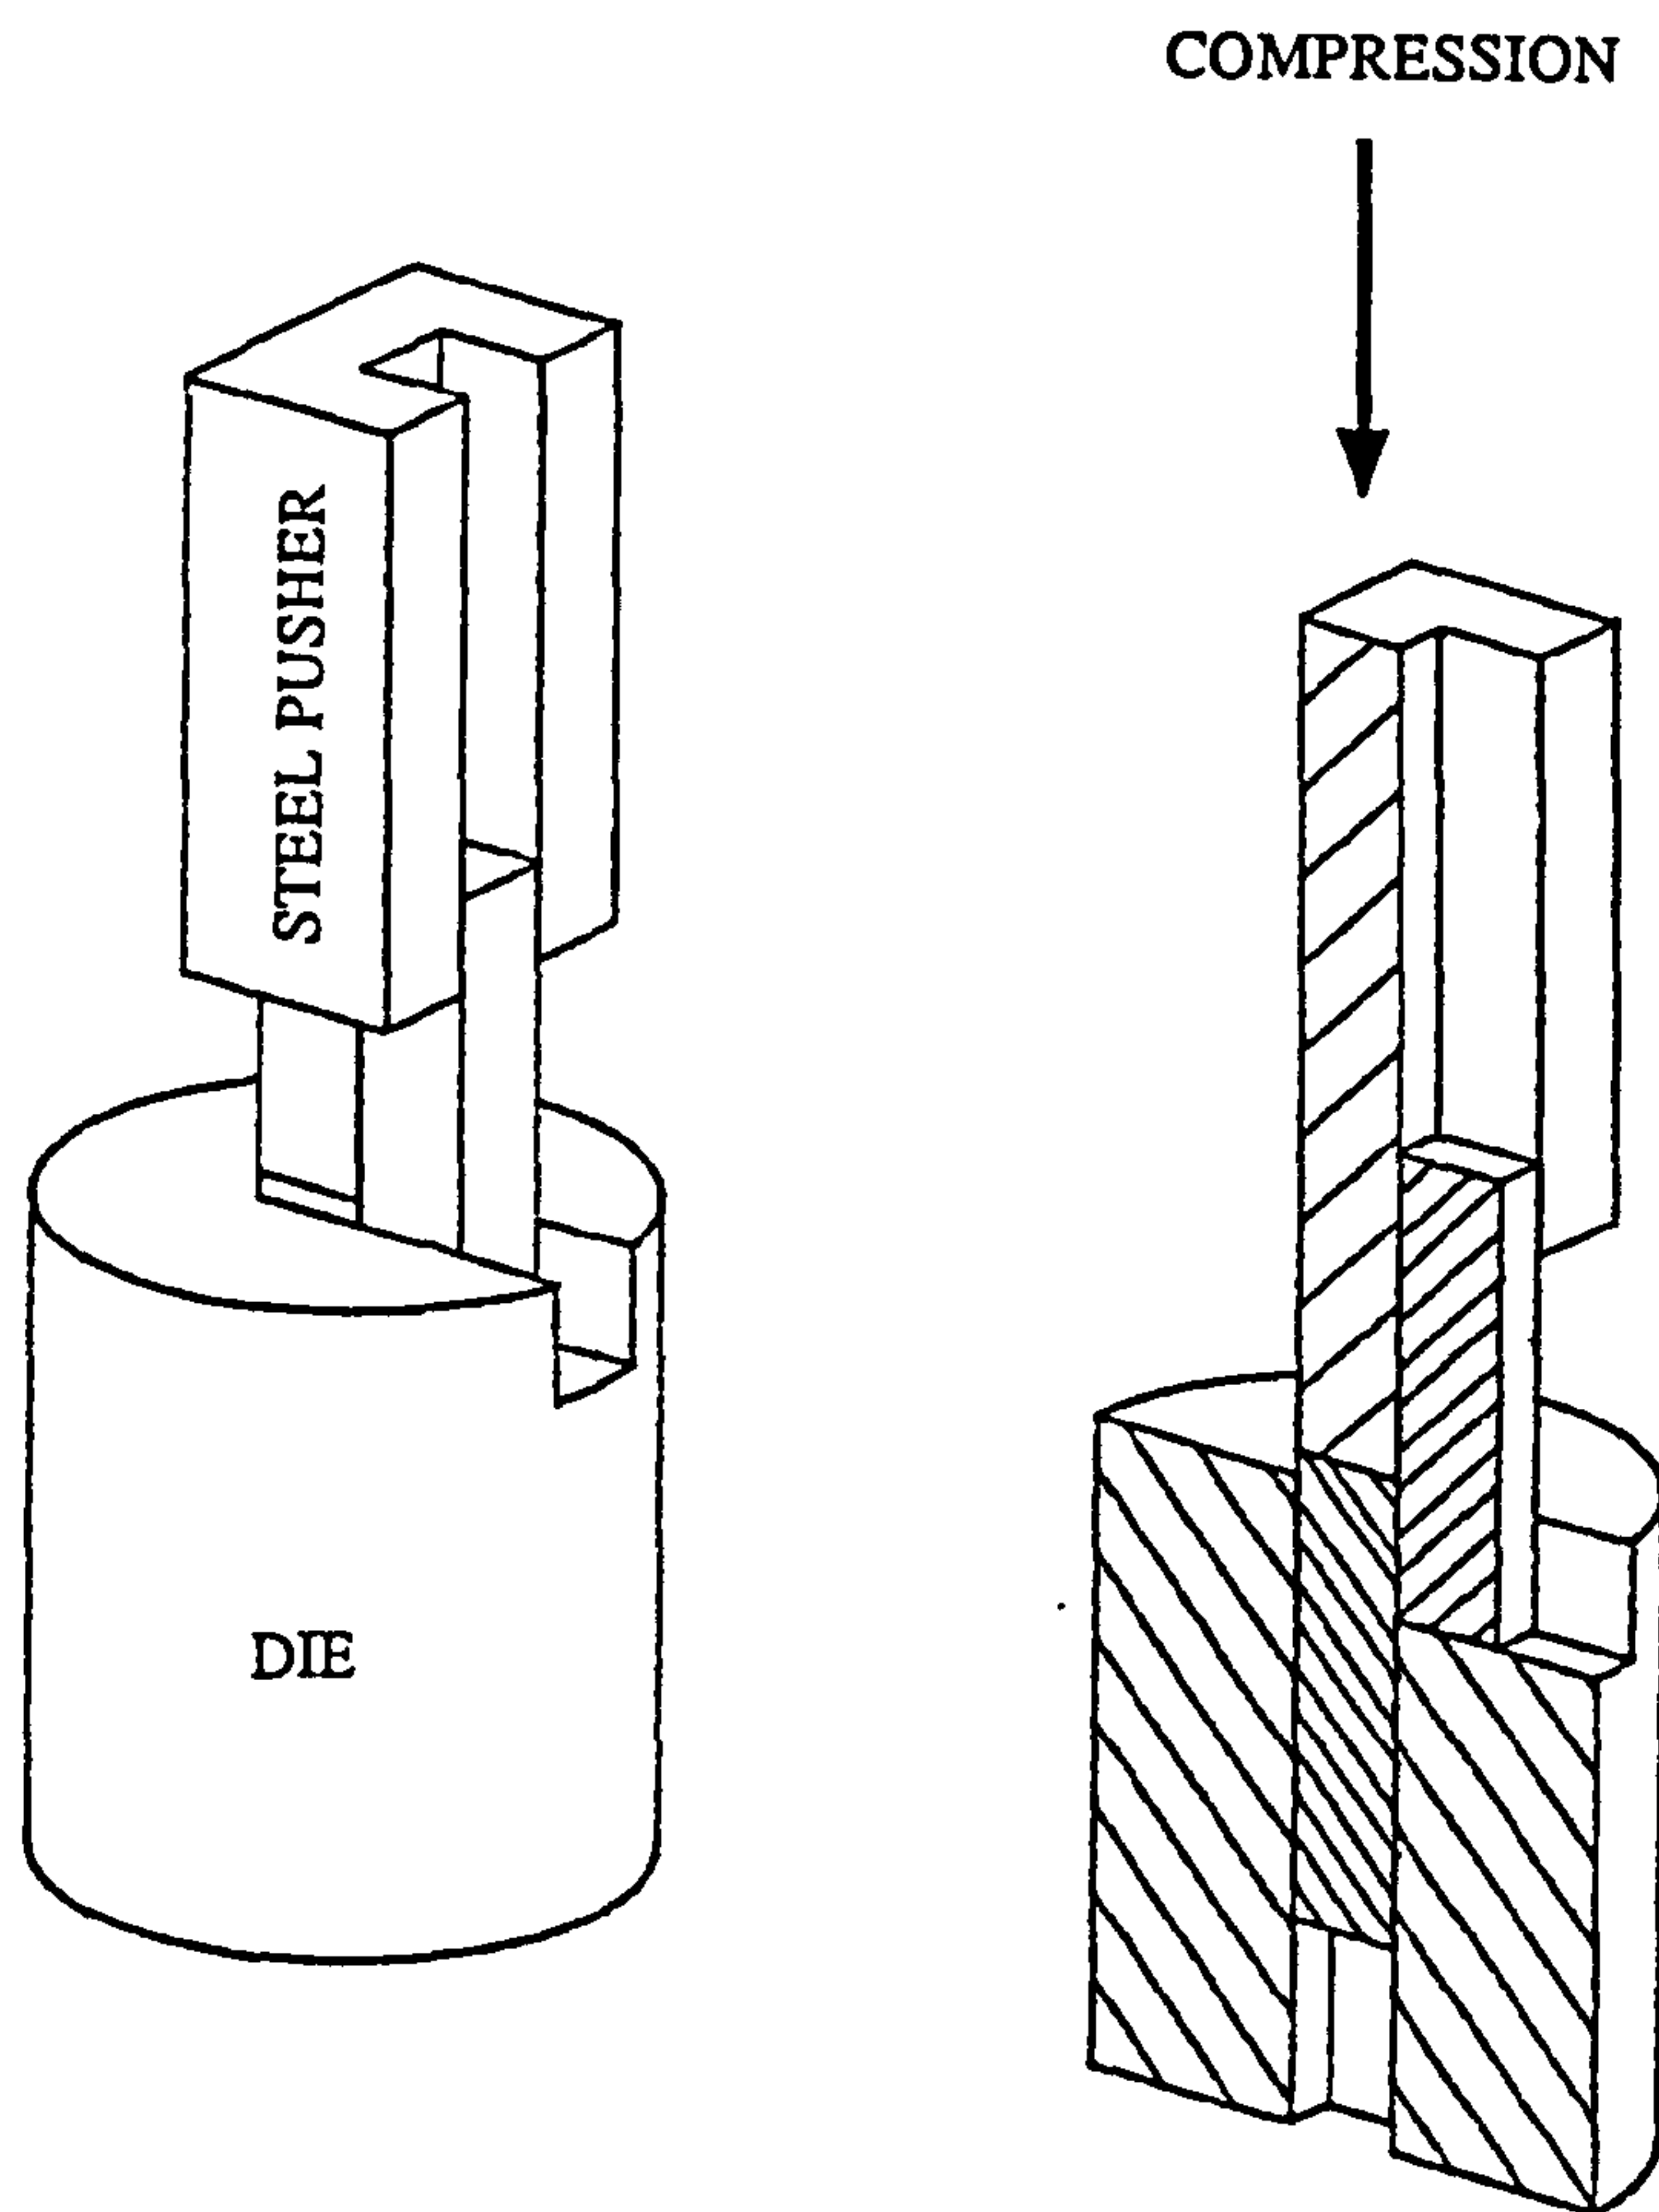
Schematic arrangement of shear testing of single lap brazed joint.
